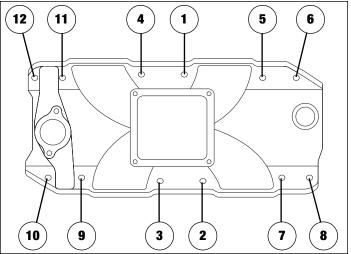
396-502 C.I.D. Chevrolet Bolt Torque Sequence Torque Bolts To 25 ft./lbs.
